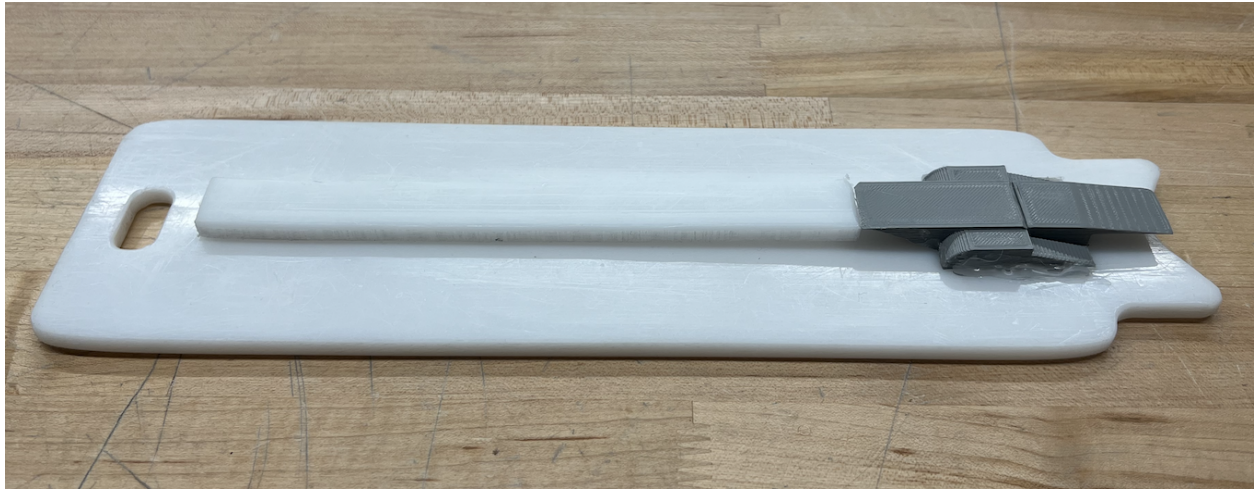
Picture of acrylic mount extension and PLA printed mount and wedge attached to plate pushing mechanism by hot glue. The detailed engineering drawings of the wedge can be found in Appendix C.
